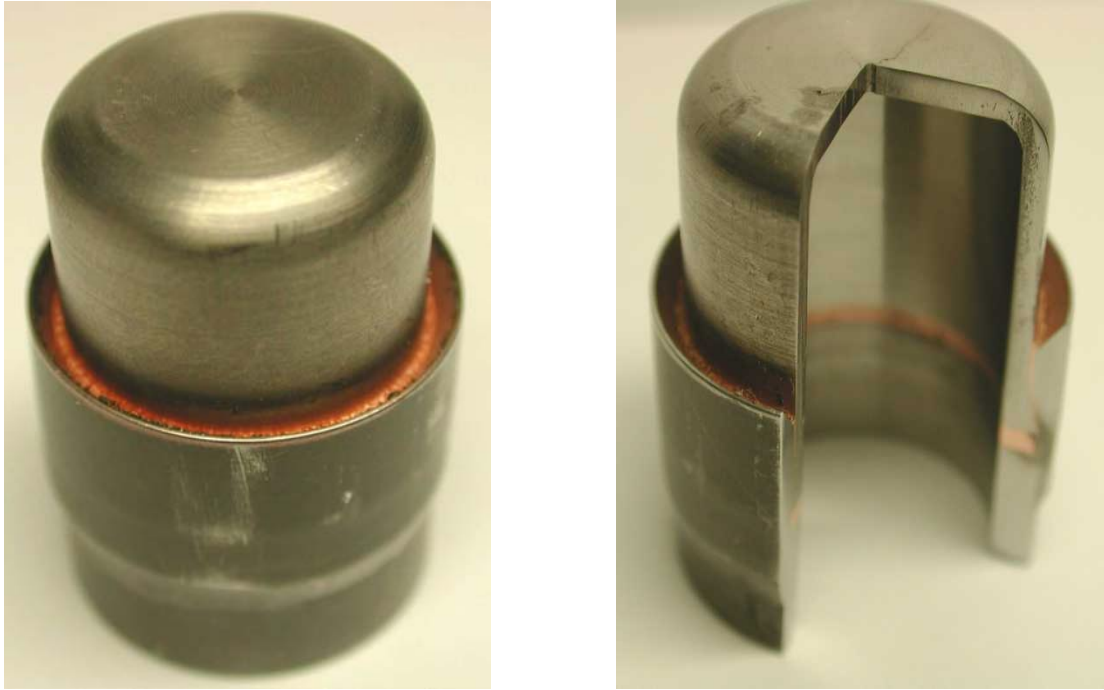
W-steel joint with pin-type locking.
